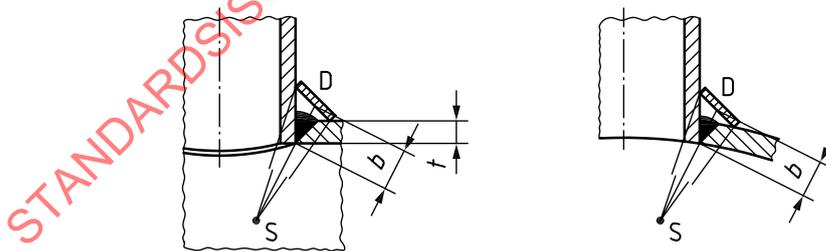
Arrangement for testing of set-in welds with the radiation source located off-centre inside the object and the detector outside
